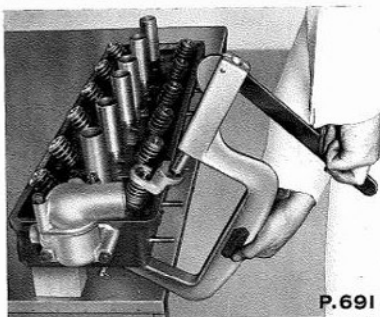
Compressing the valve spring and cup, using Churchill Tool R.G.6513, in conjunction with the compressor foot R.G.6513-2
